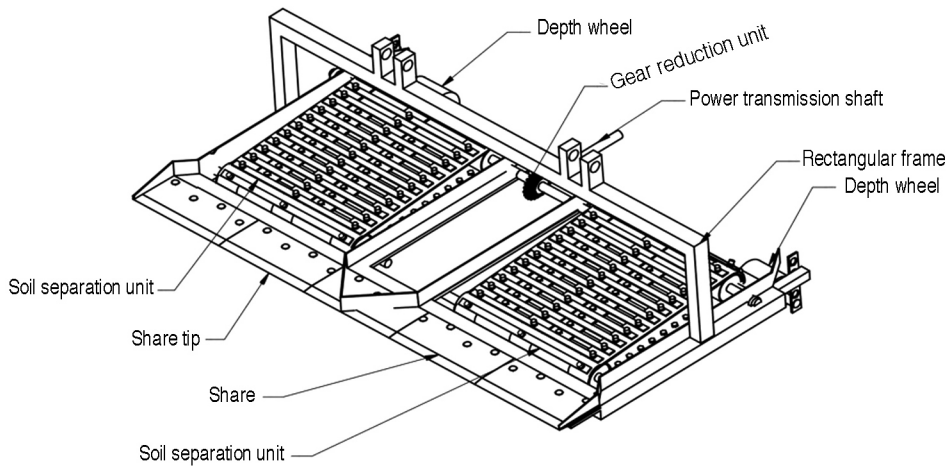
Schematic view of tractor front mounted twin conveyor onion digger.
